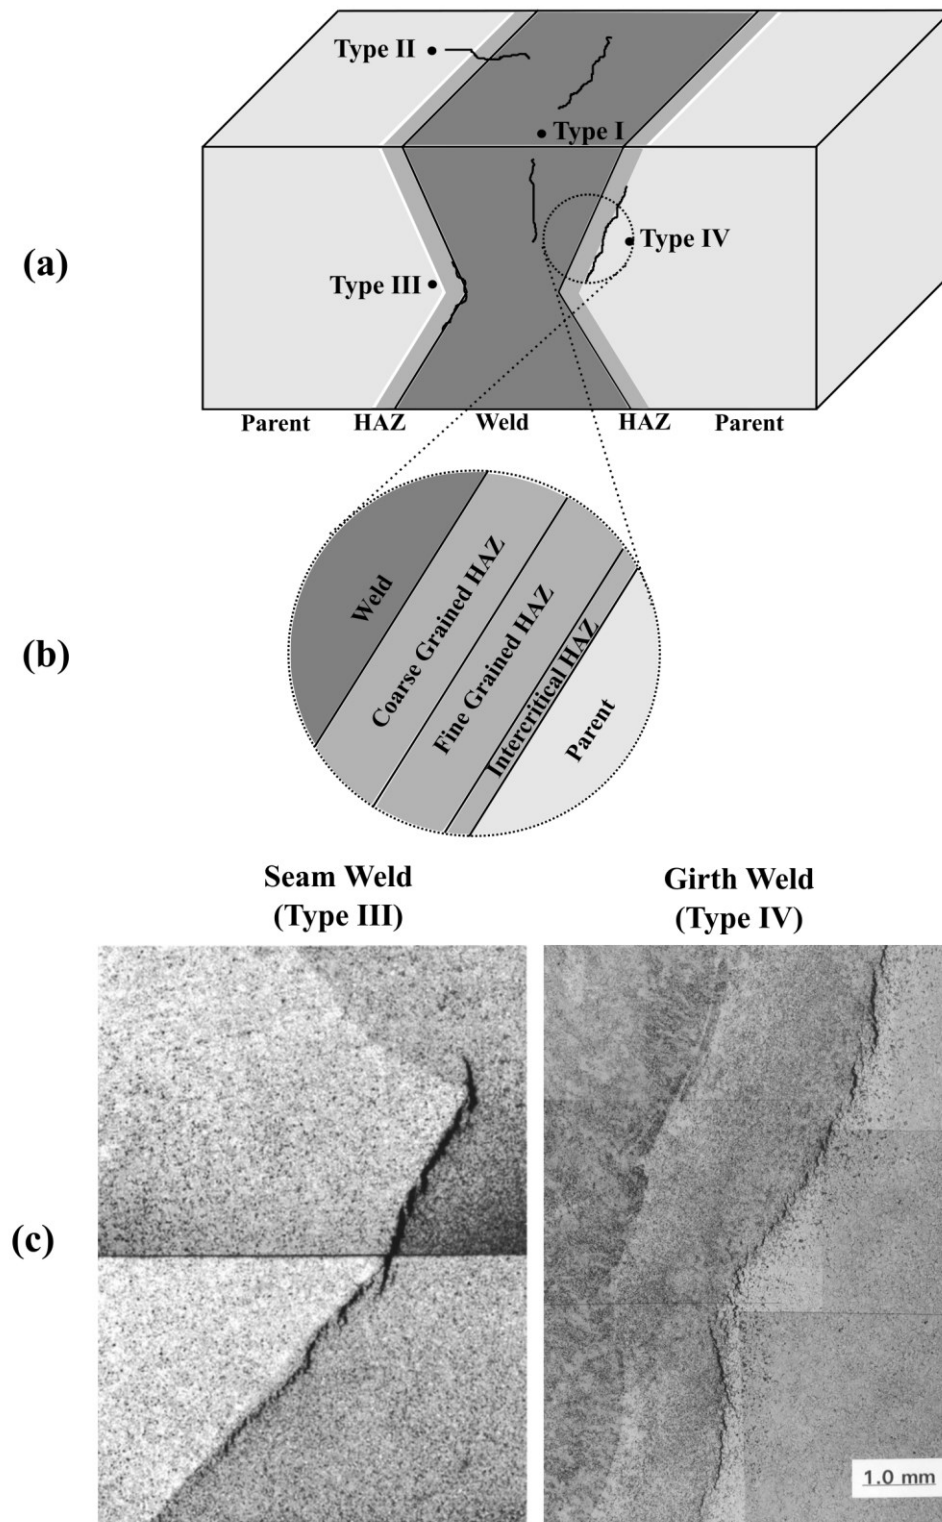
(a) The weld damage classification scheme as suggest by Schüller. (b) The macrostructure of the HAZ showing the position of the Intercritical HAZ (ICHAZ) where Type IV failure occurs. (c) Examples of (left) typical seam weld failure initiating at the cusp of a double-V joint (Viswanathan, 2000) and (right) Type IV failure which is a common issue in girth welds (Sposito, Ward, et al., 2010).
